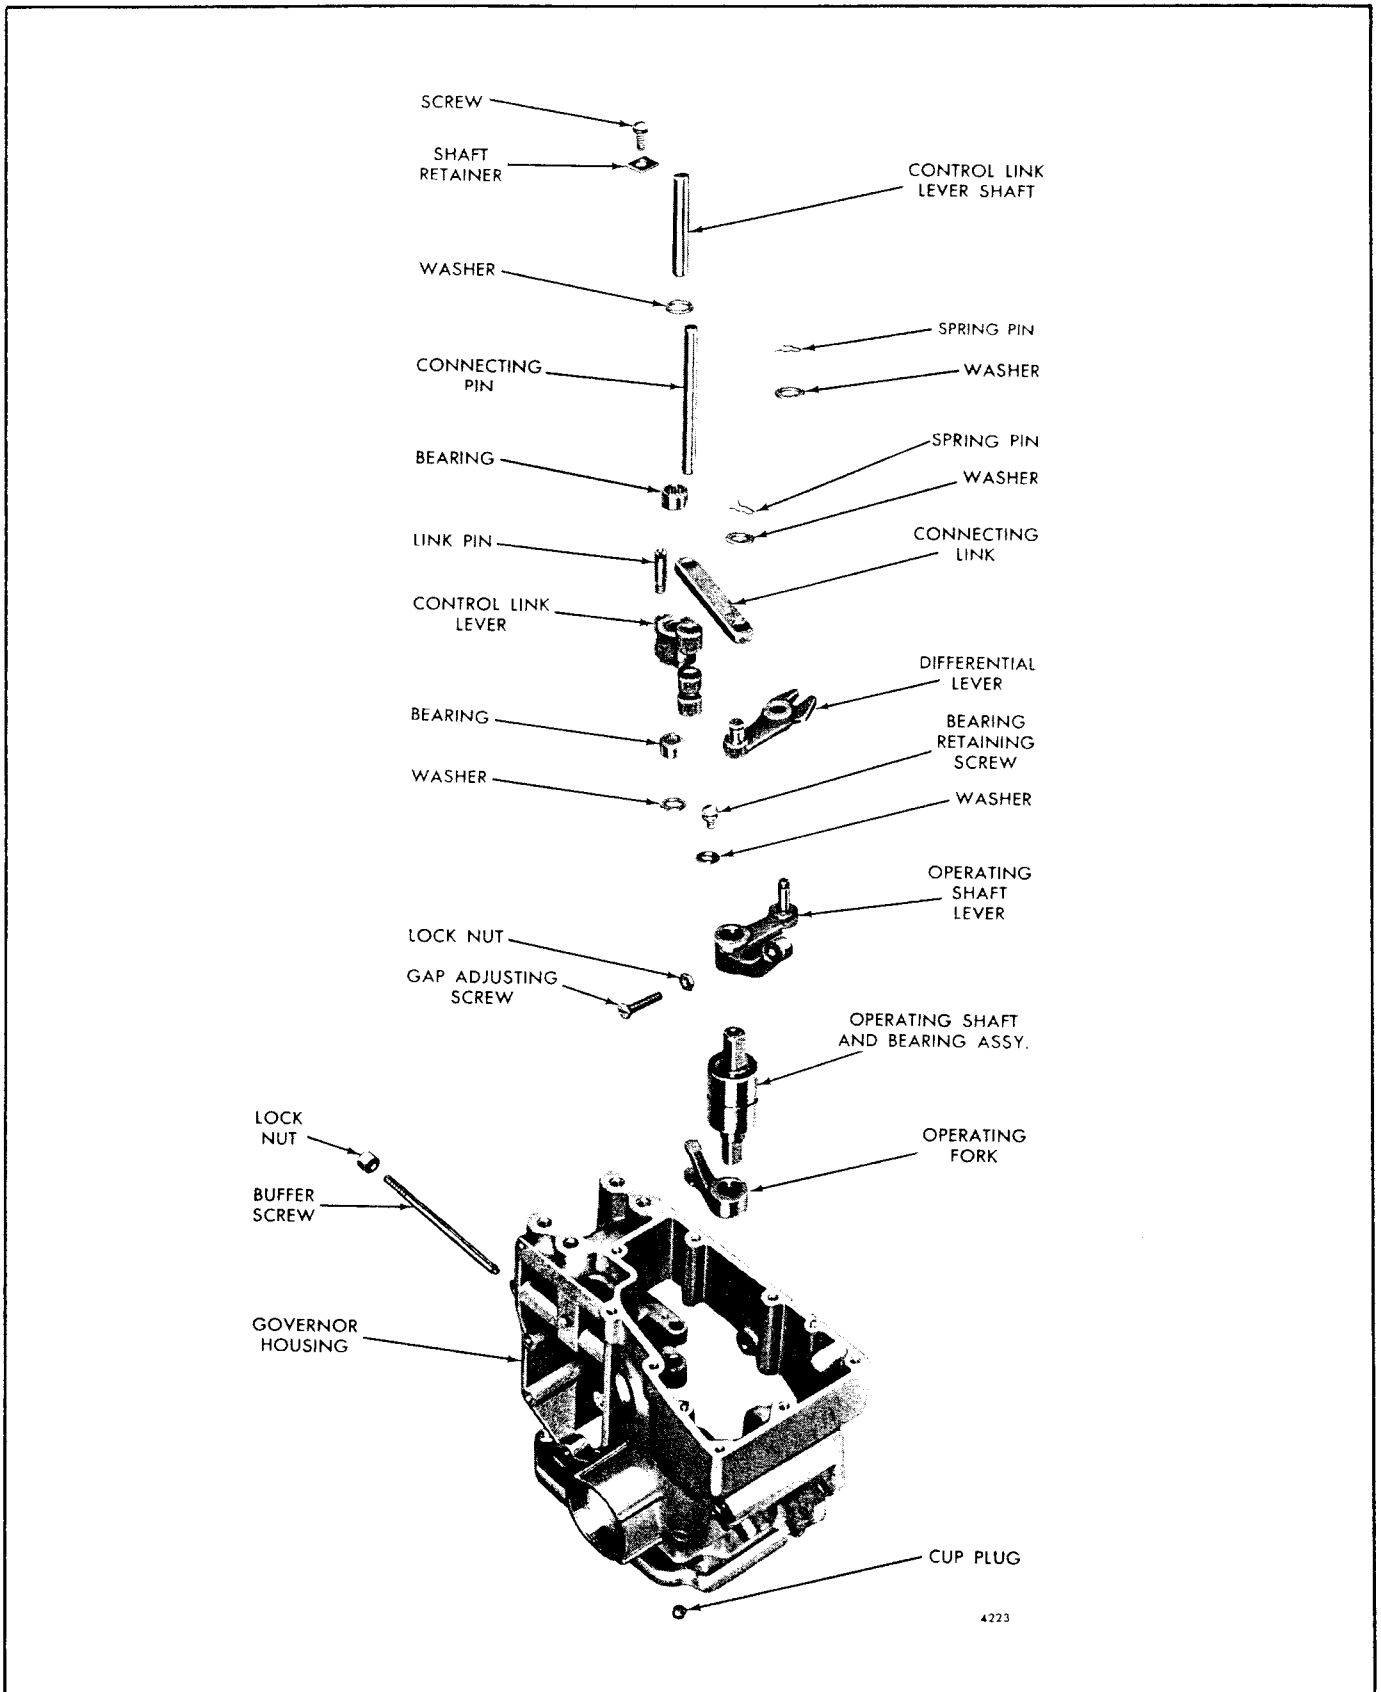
Governor Housing and Operating Shaft Details and Relative Location of Parts
